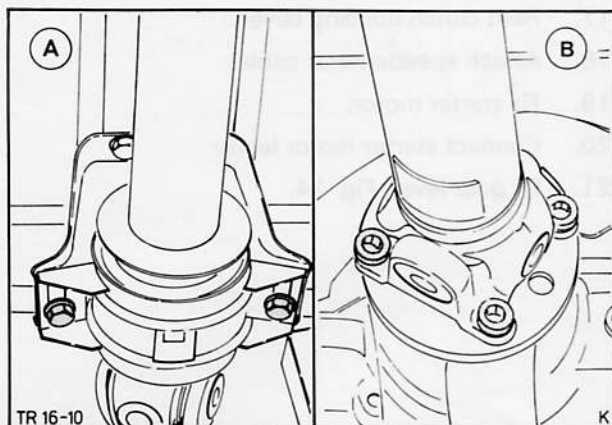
Driveshaft mounting – rear axle flange and centre bearing
